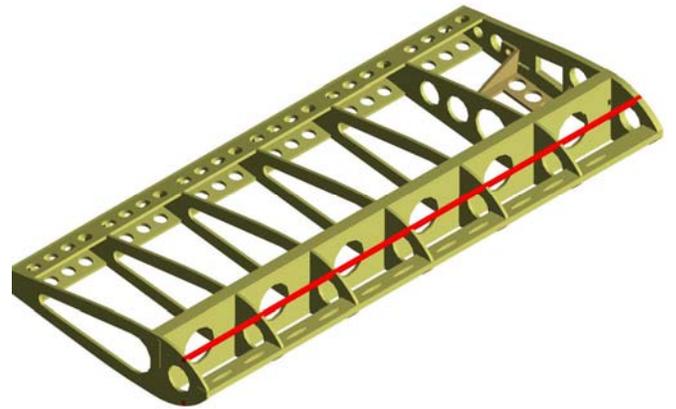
Insert and glue 3/32"x1/16" stringers. Sand all pieces that protrude beyond W1 and W7 flush.
